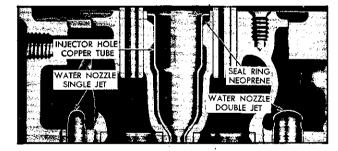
Sections Through Cylinder Head Showing Water Cooling of Valves and Injector.
